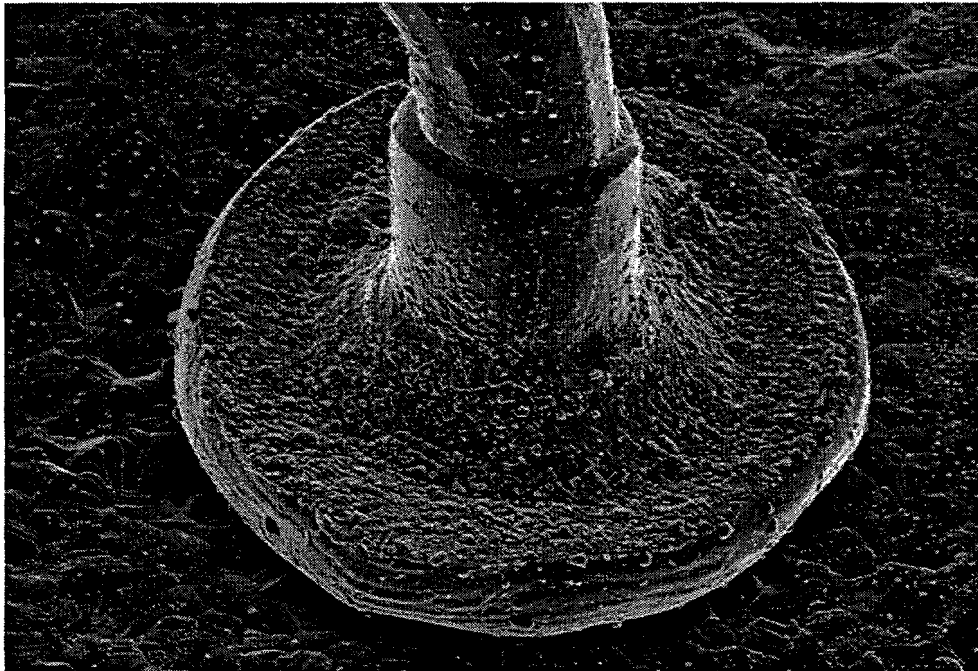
Light Particles on the Surface of the Gold Ball Bond and Silver Thick Film Material Were Identified as Containing Silver and Chlorine.
